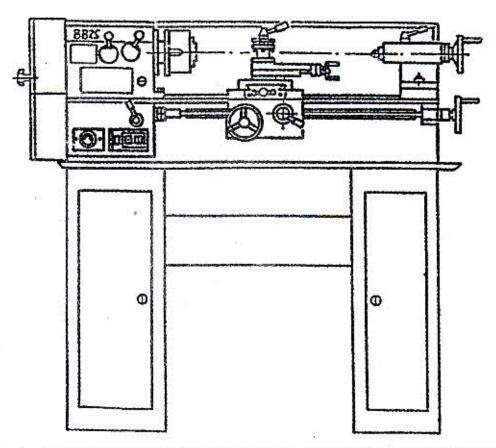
2 OUTLINE DRAWING OF BV25B - 2 BASE FRAME CUTTING MACHINE
